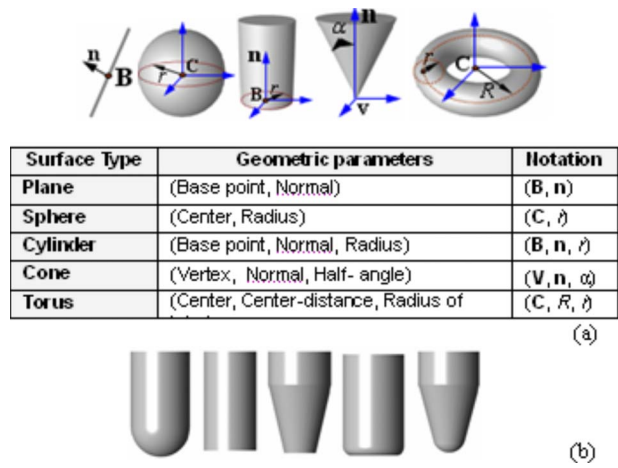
Constituent surfaces of (a) milling cutters and (b) some typical milling cutter surfaces
